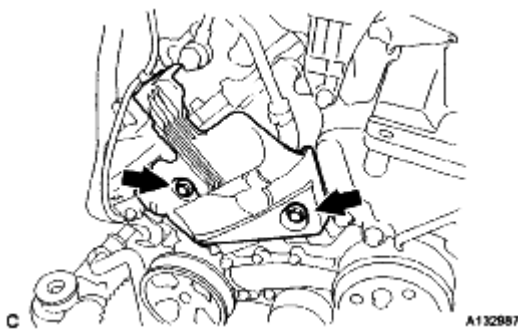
Removing Bolts And No. 2 Timing Gear Cover
